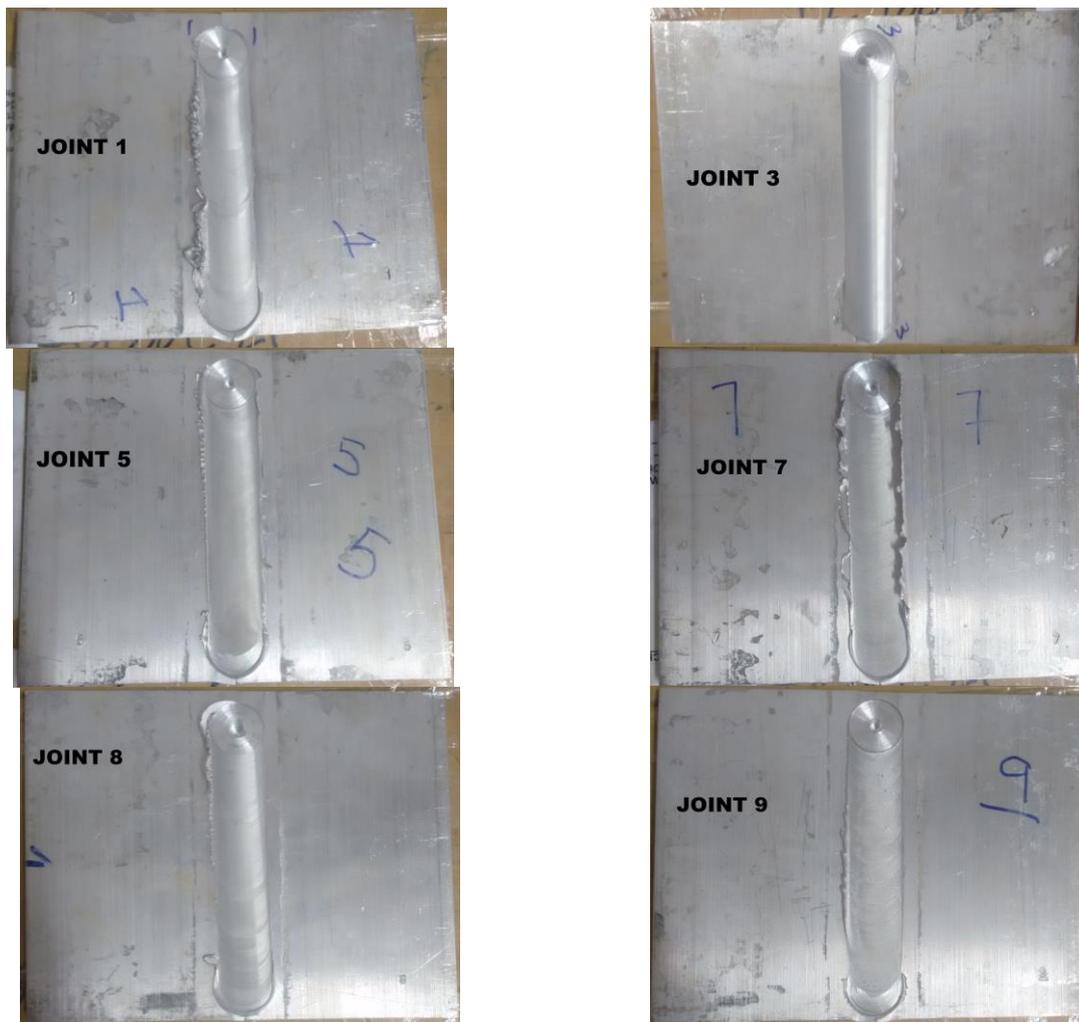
Fig I: Post welded joints 1, 3, 5, 7, 8, 9
